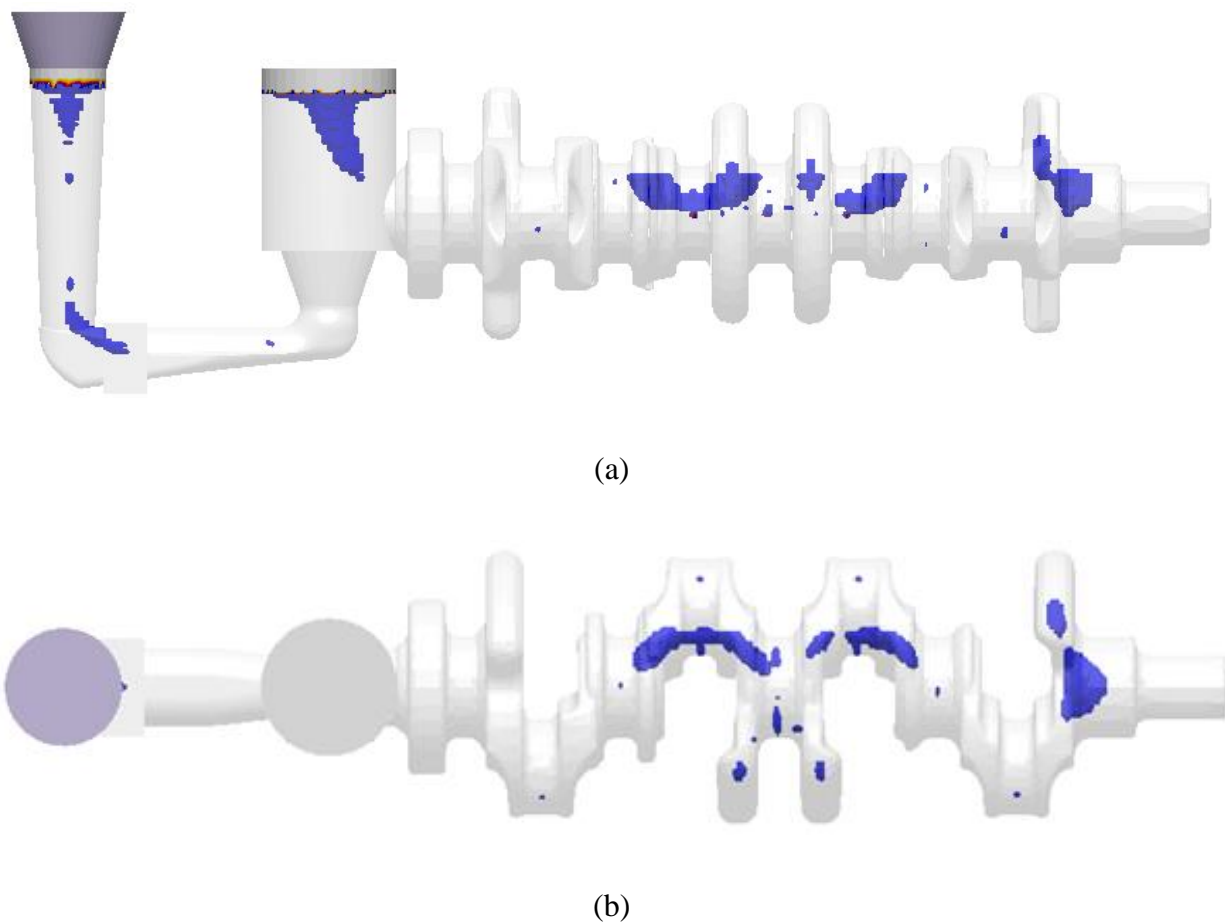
An x-ray (a) side and (b) top view of the crankshaft with one riser and a new core in the rear main journal. The blue areas indicate locations of high porosity within the crankshaft.
